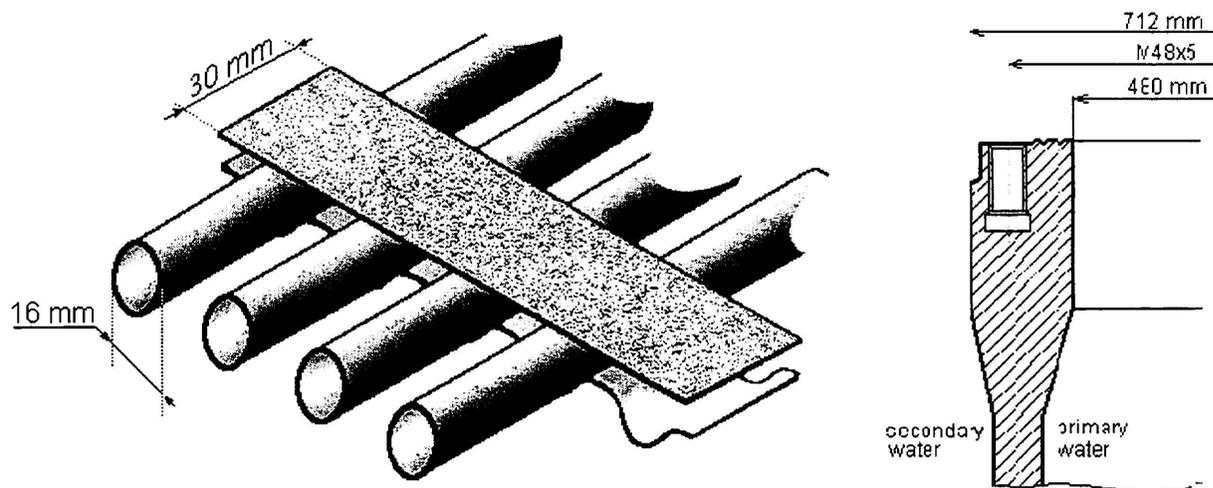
WWER steam generator tube support plate and primary collector thread hole
